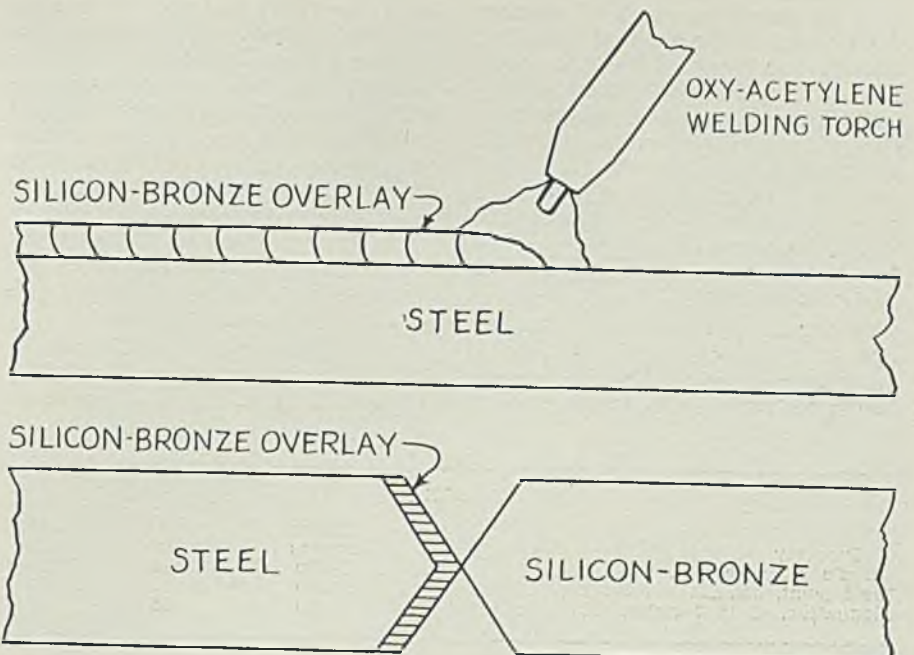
Method of applying overlay of bronze to steel before welding
